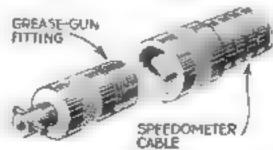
An old grease-gun fitting screwed to speedometer cable shaft helps lubrication
